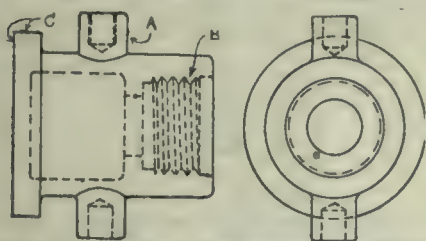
SKETCH OF PIECE SHOWING BOSSES FROM WHICH THREAD MUST BE POSITIONED.
